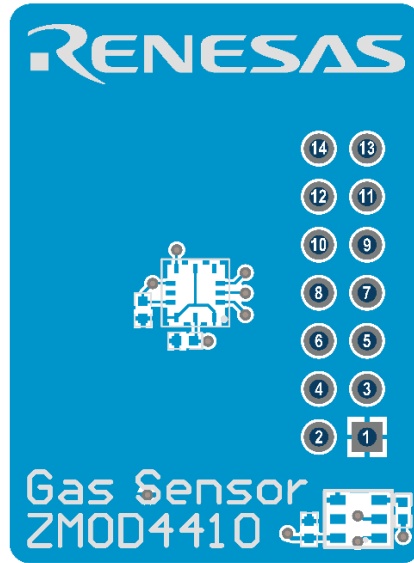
Sensor Board Layout – Top Layer with PIN Configuration on Connector X1
